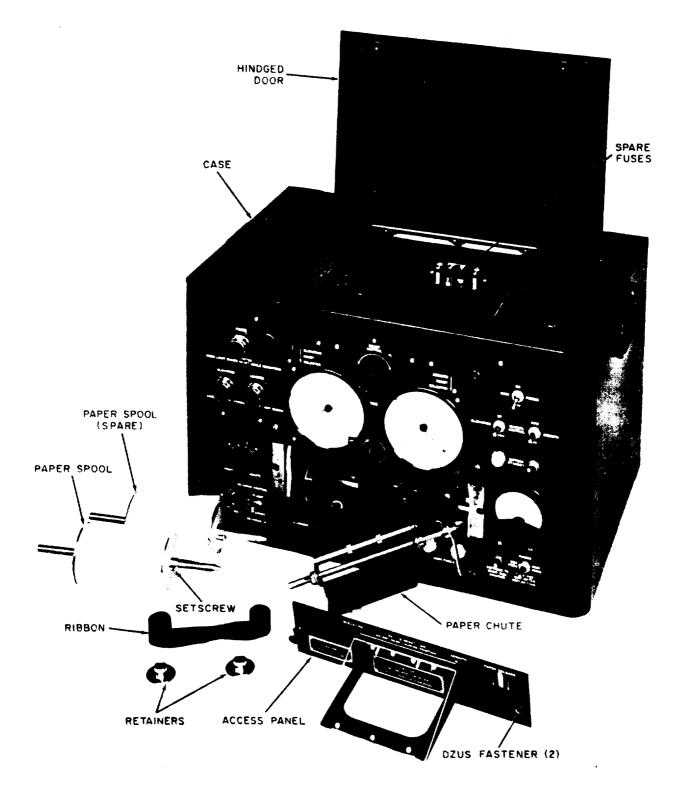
Control-Recorder C-577(*)/GMD-1, partially exploded view.
